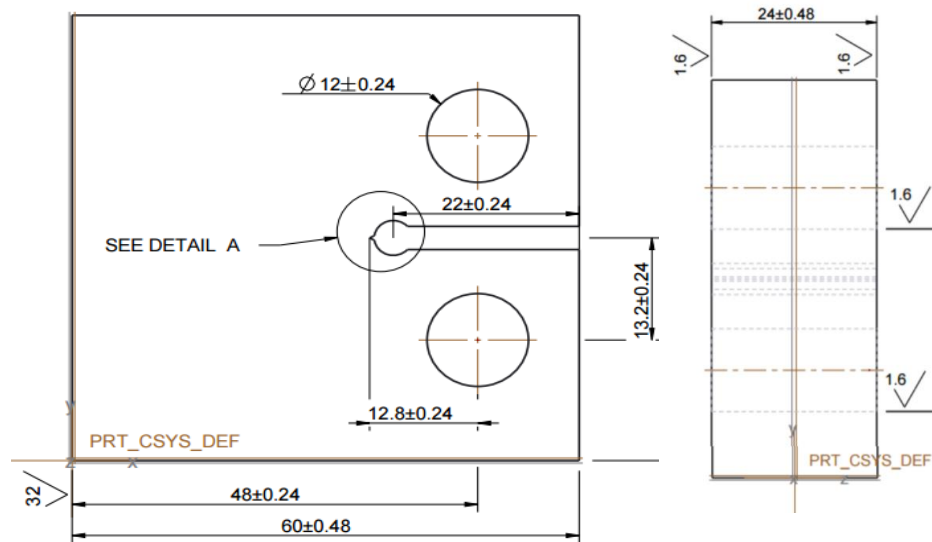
TRIANGULAR AND CIRCULAR CRACK FATIGUE SPECIMENS
